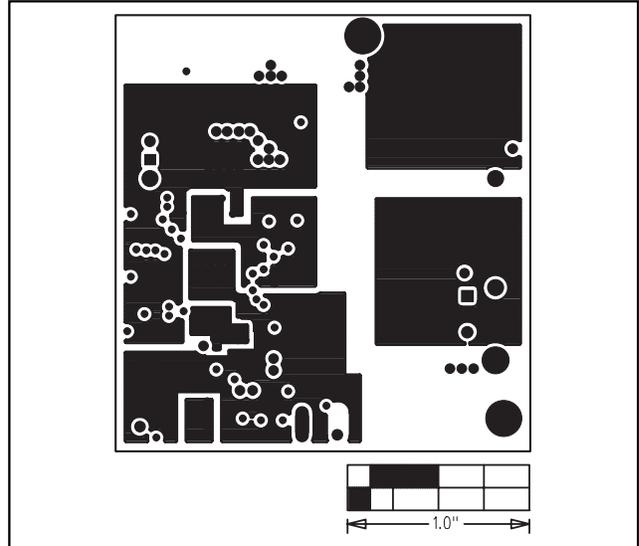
MAX5042 EV Kit PC Board Layout—Inner Layer, Vcc Layer 3
